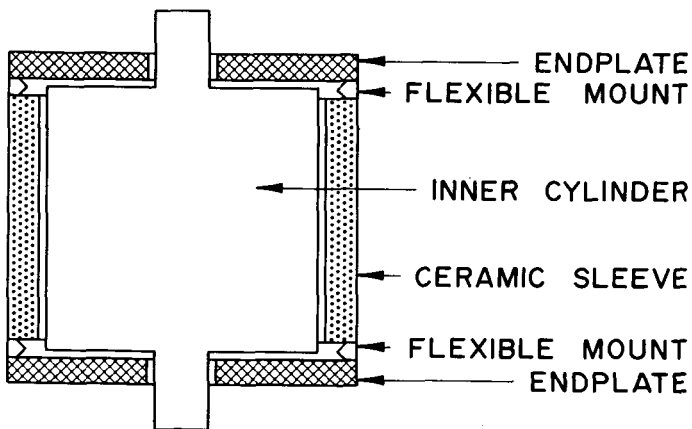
ONE TRANSDUCER SQUEEZE FILM BEARING
